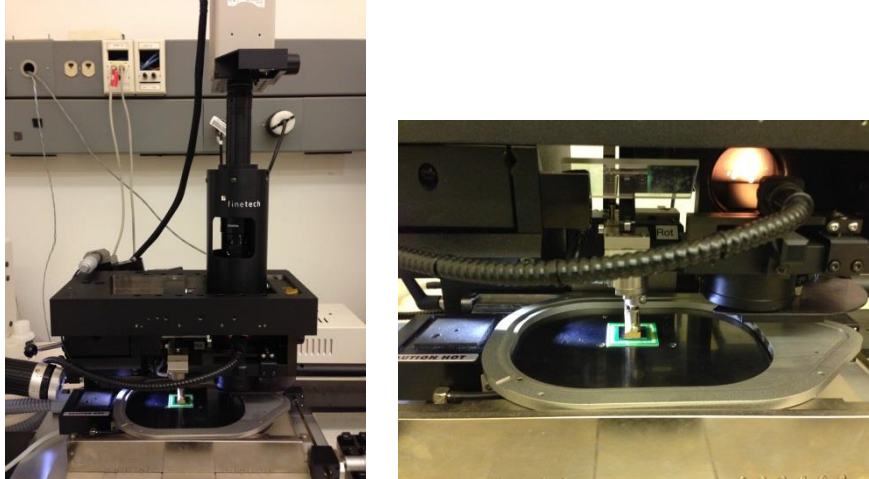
A silicon substrate (18mm × 18mm × 0.675mm) assembled on an organic board (33mm × 33mm × 0.75mm) through solder reflow using Finetech® flip-chip bonder
